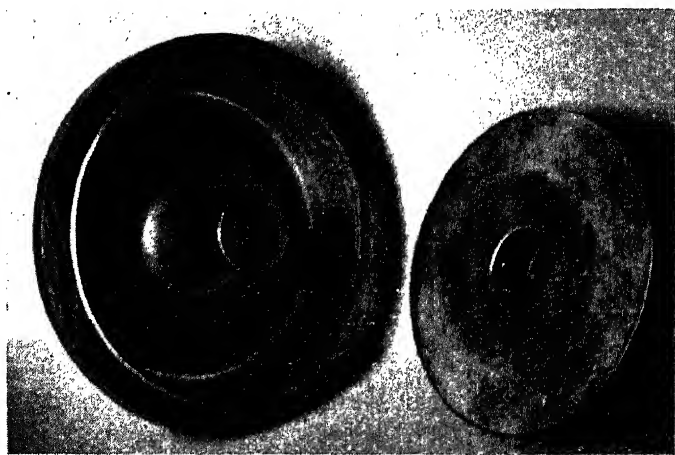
Aluminium alloy pressure die-castings which are joined together by a spinning operation
